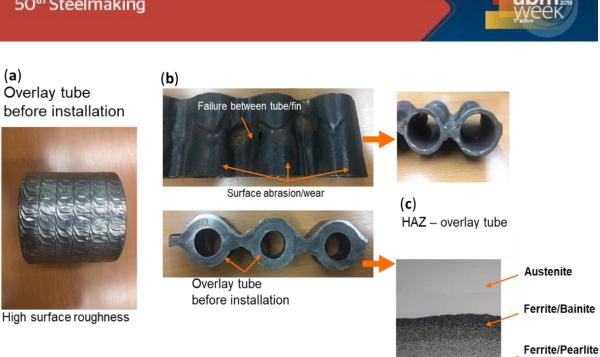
Images of the (a) rough overlay welded tube surface before installation; (b) its wearing surface after installation; (c) its 3 different microstructures because of overlay welding technology (Author, 2019).
